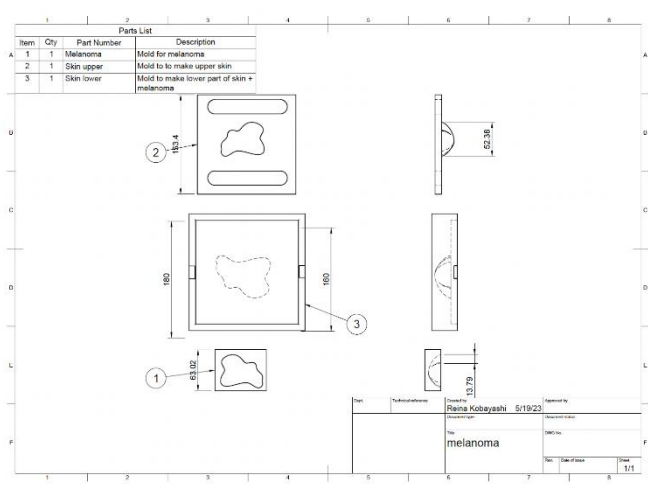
Assembly Drawing of Melanoma Tumor Cast.
